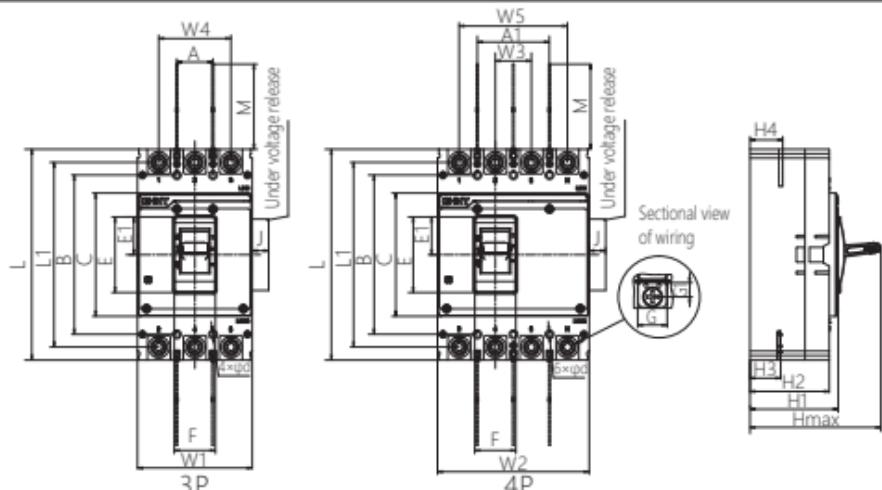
NXM-400~1600 front-panel wiring overall and installation dimension
